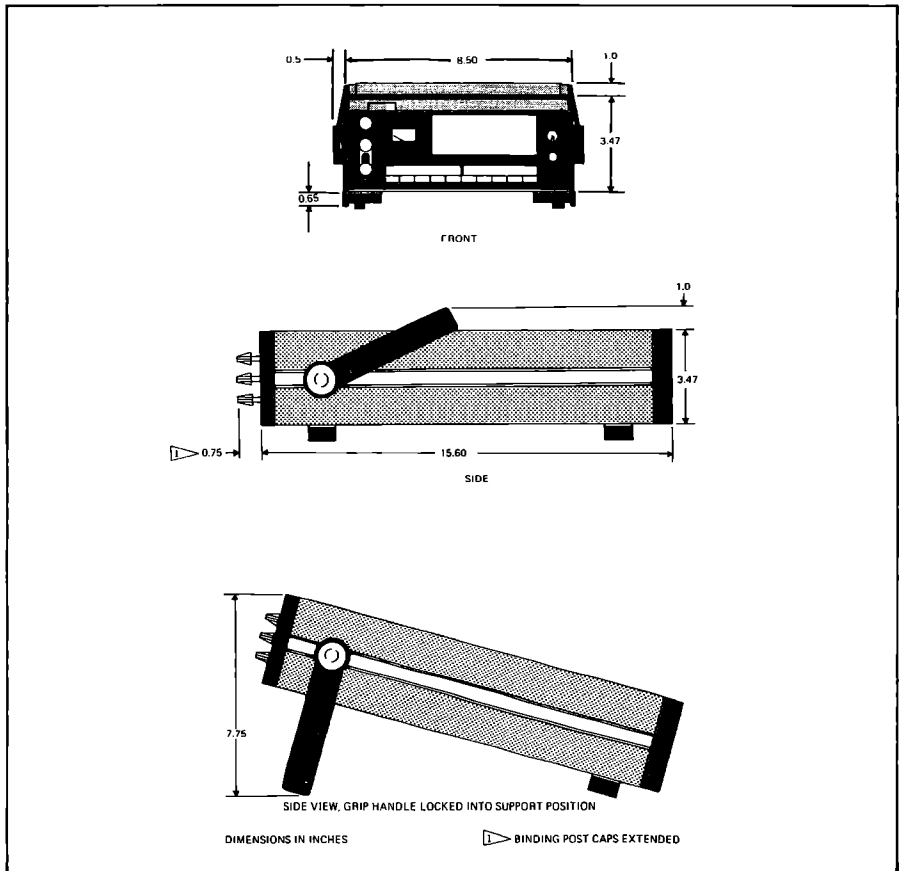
MODEL 8120A OUTLINE DRAWING
